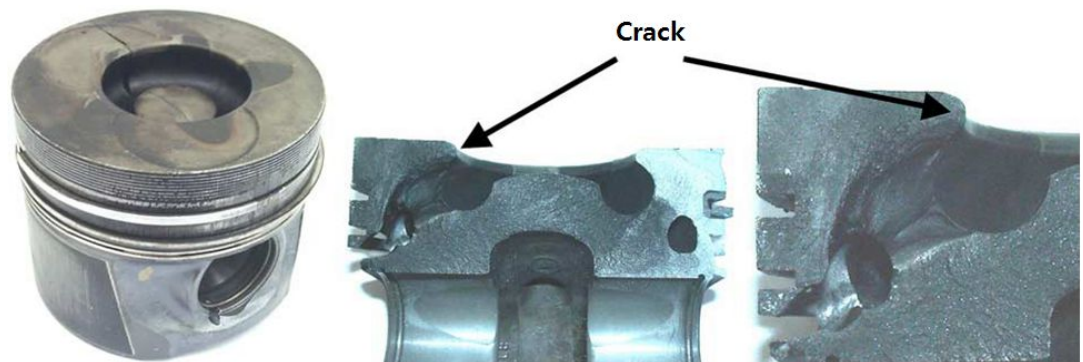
Diesel engine piston (with cooling gallery) with a crack from one side of the pin hole to the head
